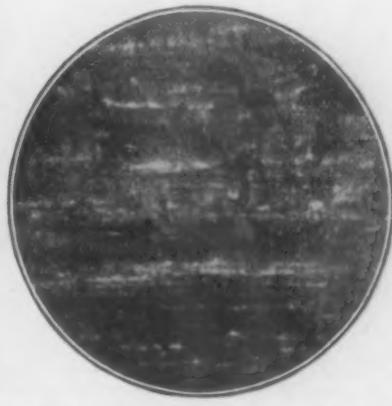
Cast-Iron Surface Showing Gentle Machining, Oblique Illumination, Magnified 120 Diameters
